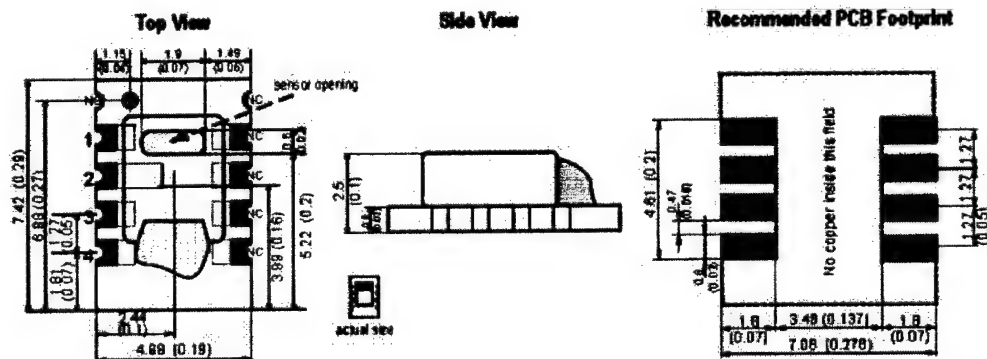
SHT1x drawing and footprint dimensions in mm (inch)
